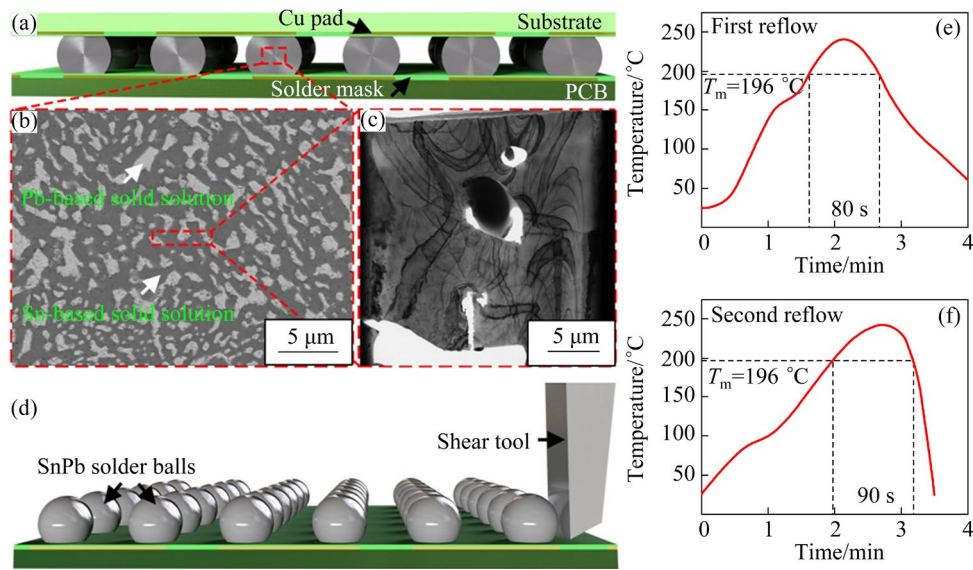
Schematics of FIB and shear specimens: (a) Cross-section of SnPb eutectic solder joint; (b) Surface of unirradiated solder joint; (c) Unirradiated FIB specimen; (d) Shear specimen; (e) Reflow profile for first reflow; (f) Reflow profile for second reflow
